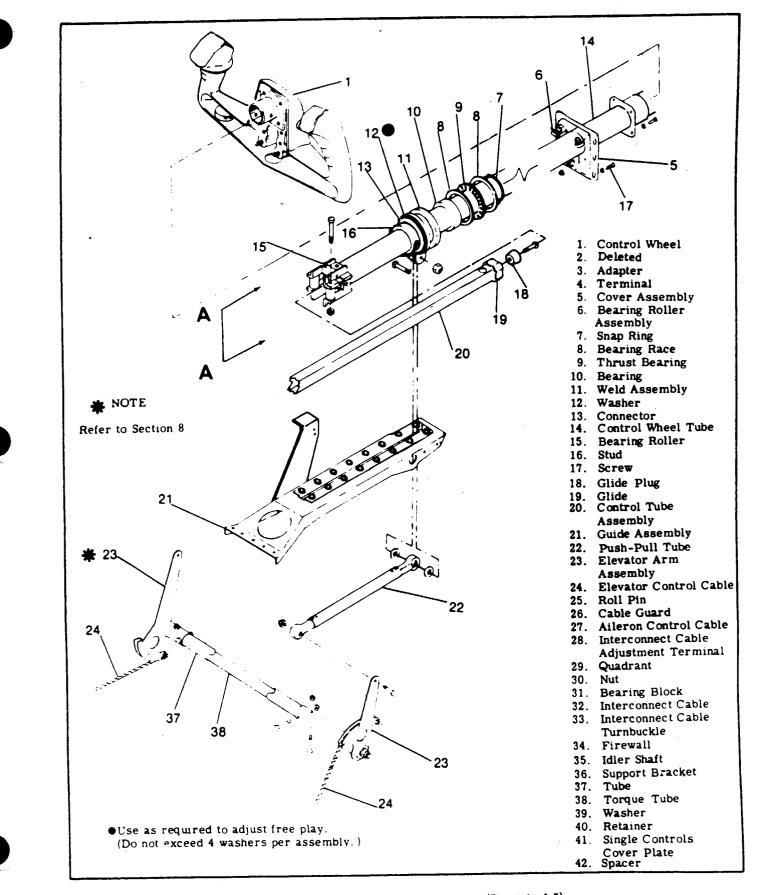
Control Column Installation (Sheet 1 of 5)
